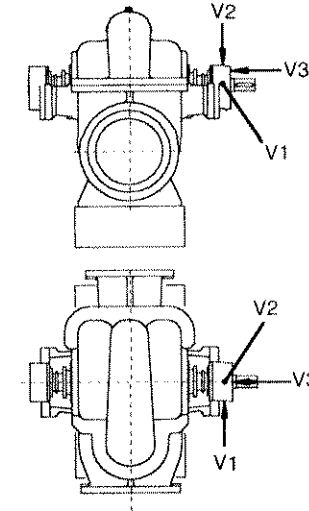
Position of accelerometers on the bearing housing of a double entry pump
